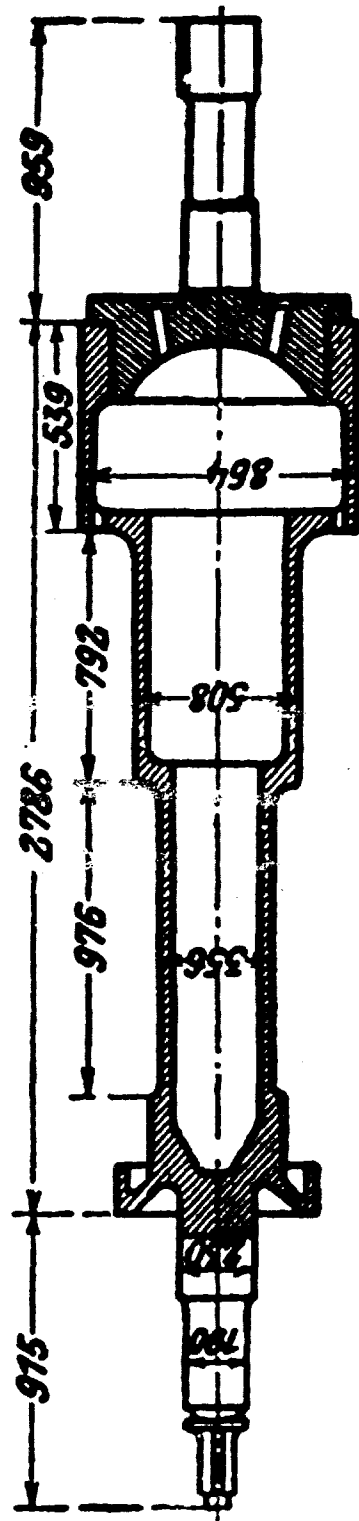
Turbogenerator Rotor, Section Showing Marine Components
